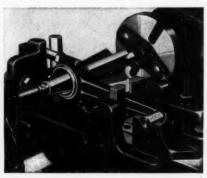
Aligning connecting rod bearing with centering cone between centers.
